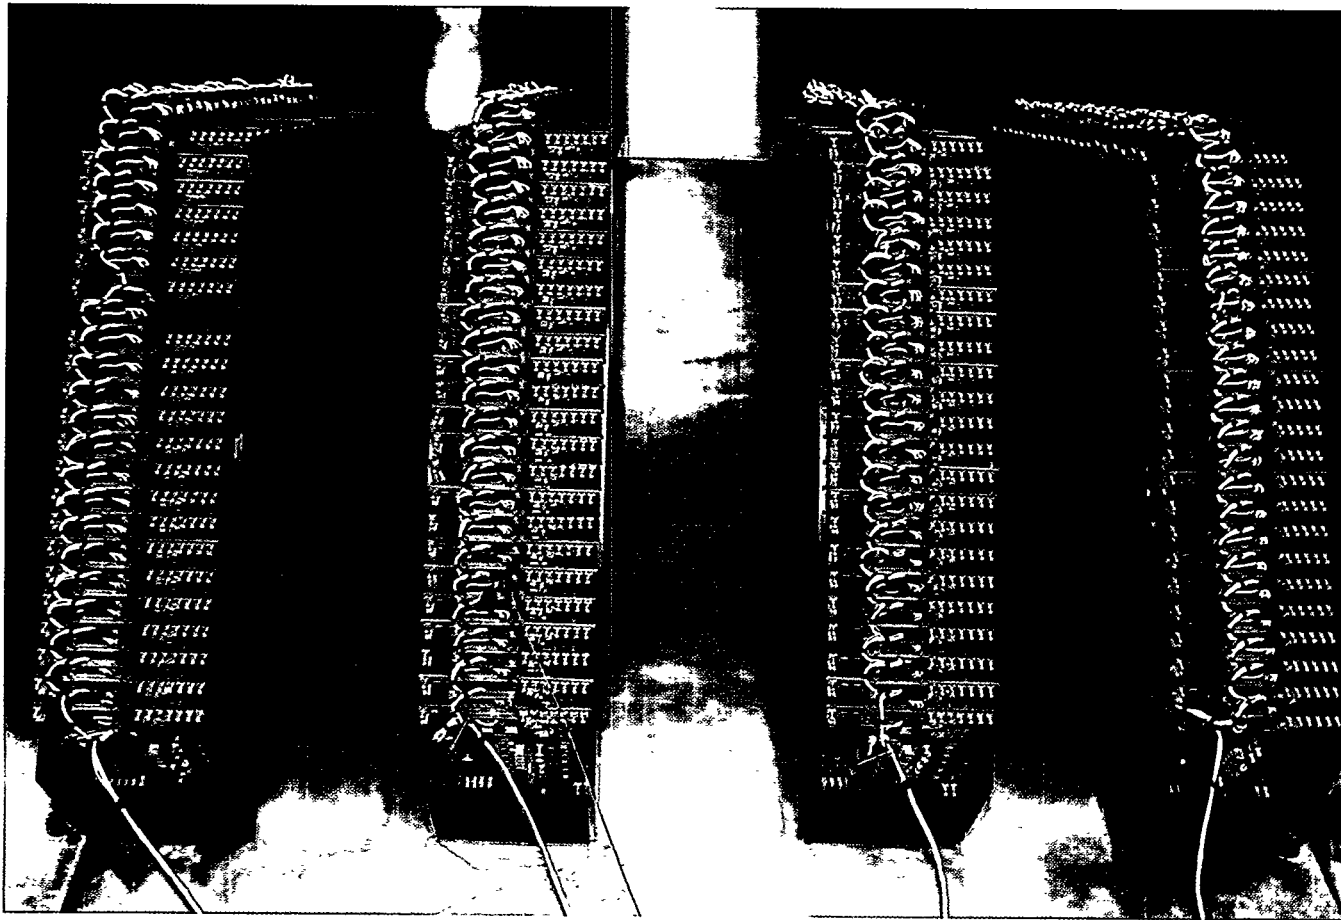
LRSTF Assemblies in the Test Chamber Racks
